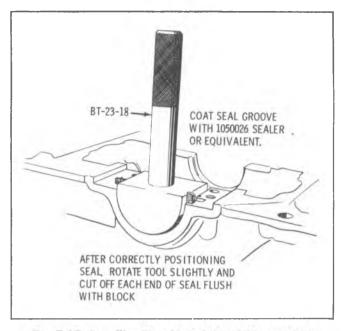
Installing Rear Main Oil Seal (Upper Half)
